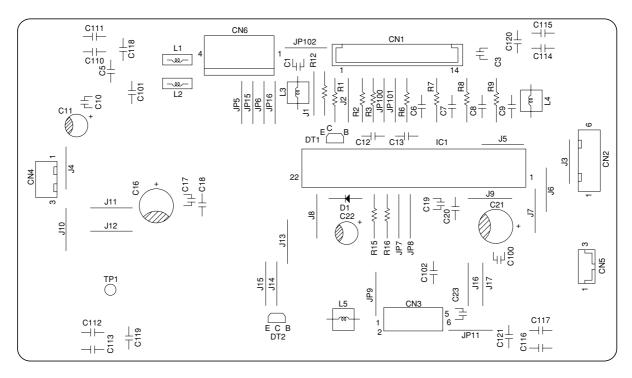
Scanner drive motor PCB silk-screen diagram
